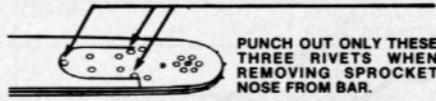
Punch out three rivets shown to remove sprocket nose on SP bar.
